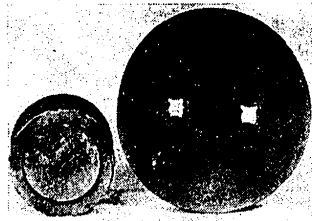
Examples of electric-discharge machining on the VJK 2 machine.
